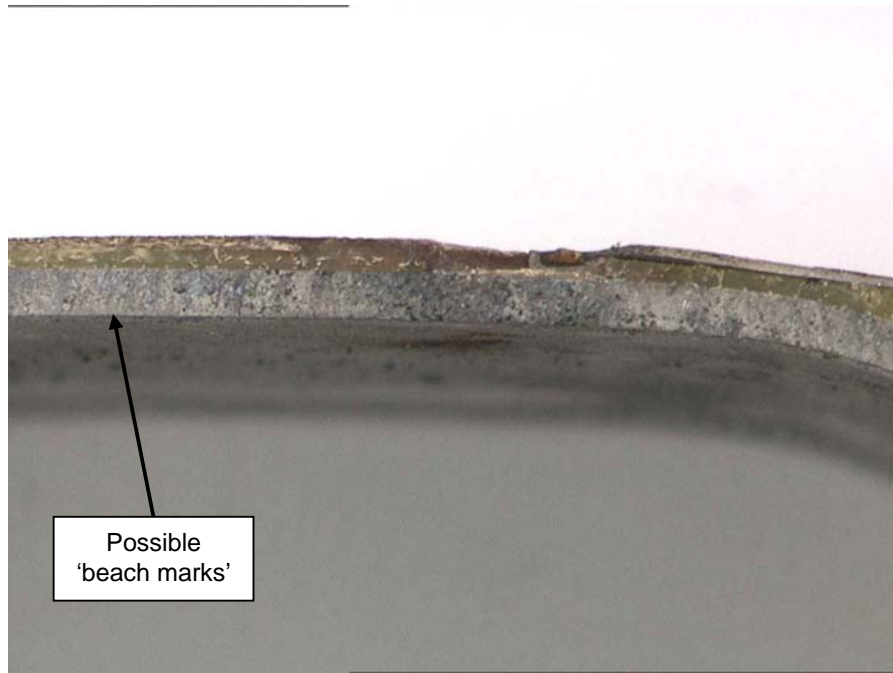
Stain on fracture surface at top of spar (identified in figure 2).
